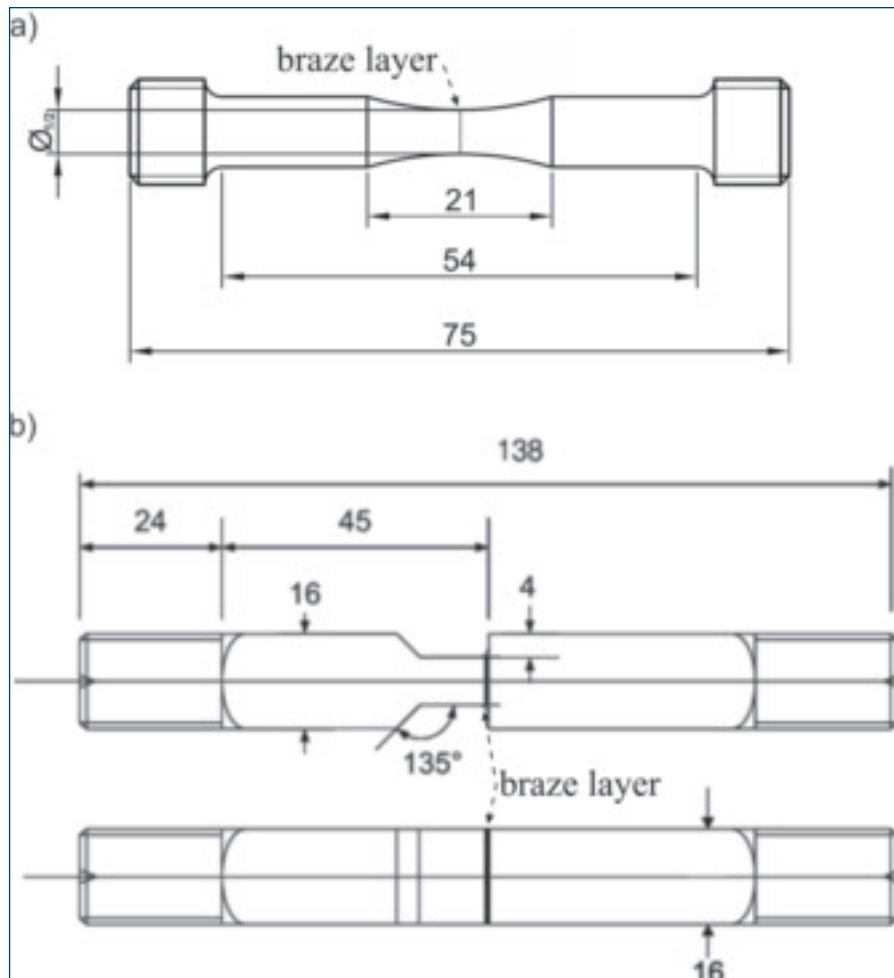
A — Standard round specimen; B — T-joint specimen geometry.
